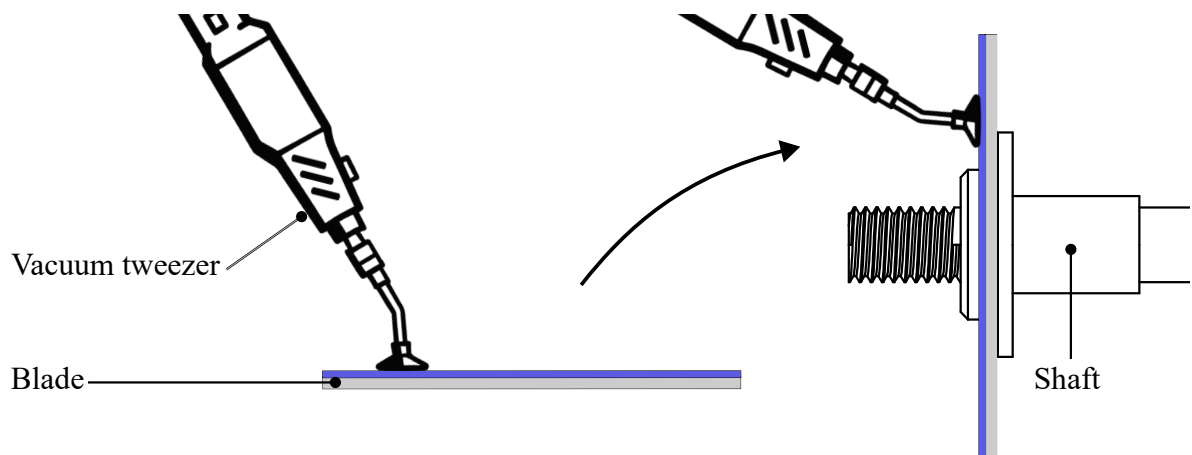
Schematic of blade mounting using a vacuum tweezer. The suction cup avoids contact with the outer edge but provides a compliant, single-point grip, which limits controllable alignment and axial assembly force as the bore engages the shaft seat.
